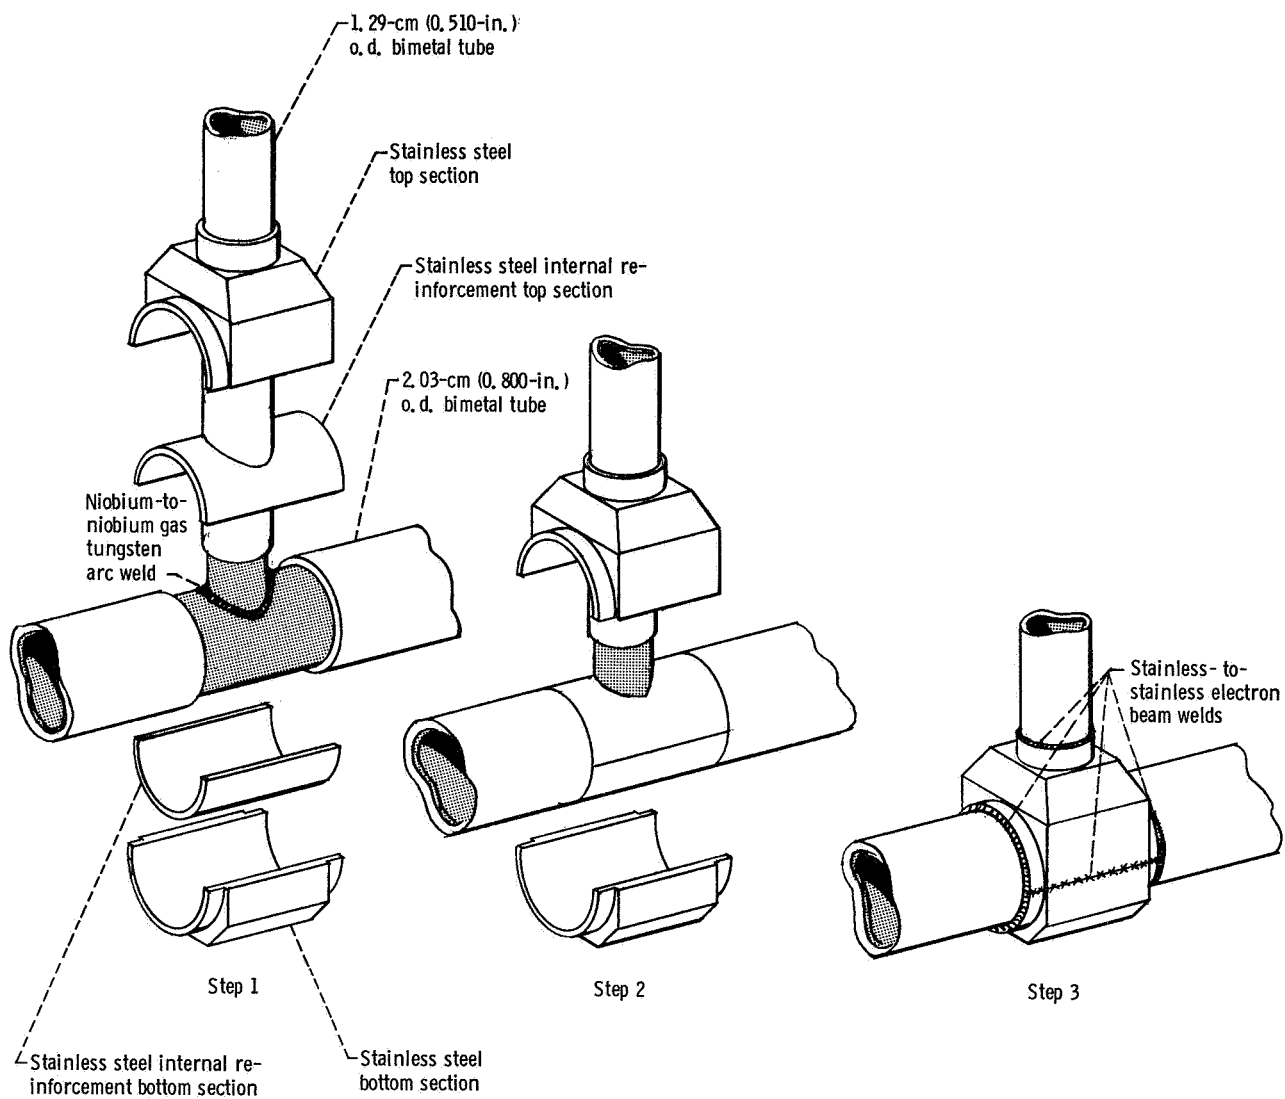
Niobium/316 stainless steel bimetalic tubing tee joint (ref. 21).
